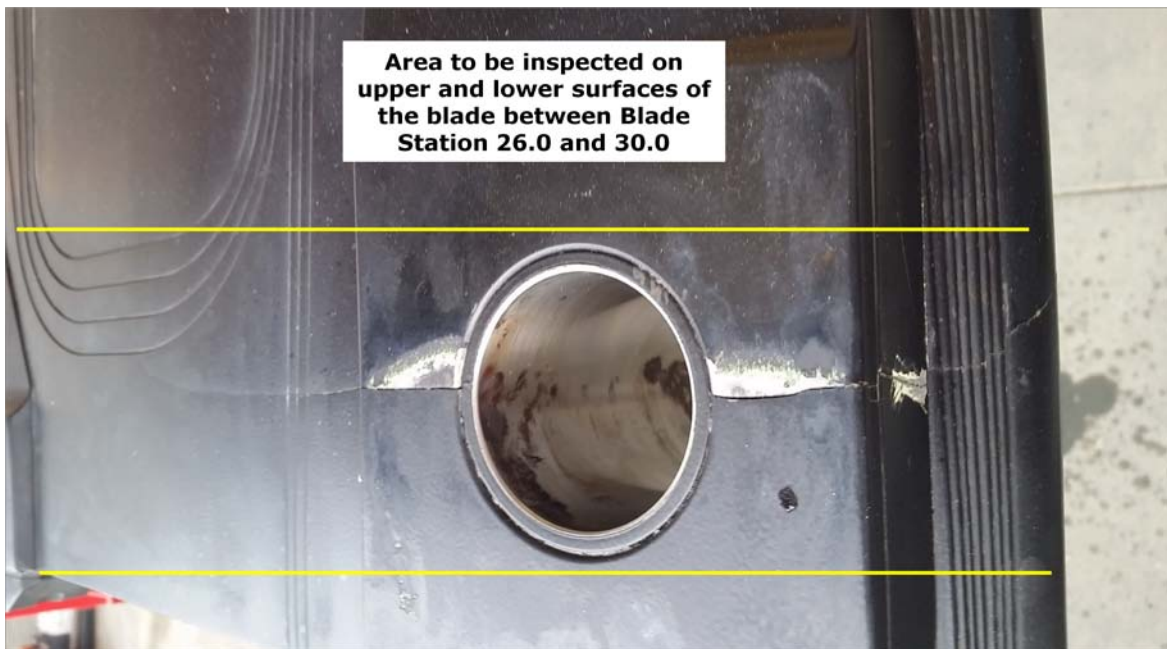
Area to be inspected with 3X Power Magnifying Glass (Upper and Lower Surfaces)
